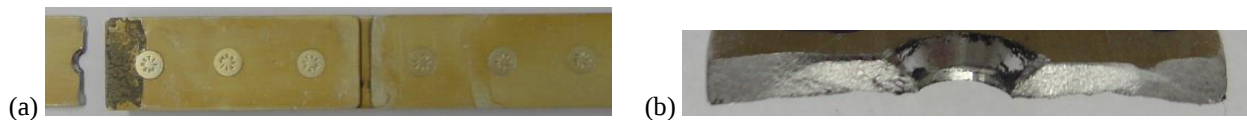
Specimen IB-22 (120 MPa): (a) fracture SH-OP; (b) fractured cross-section
